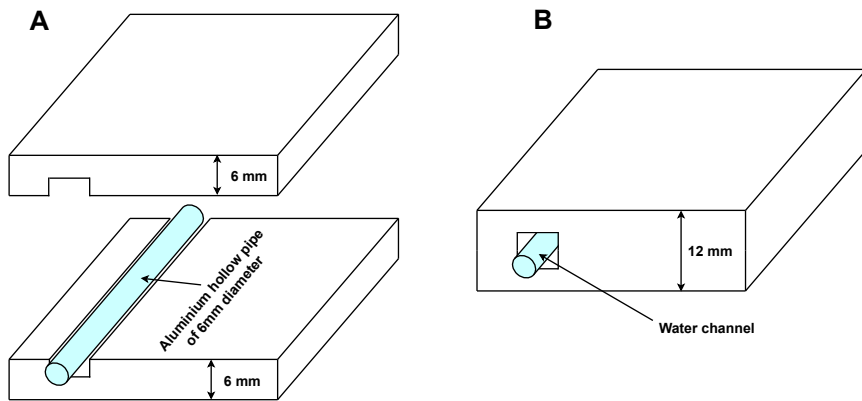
Building of water channels of diameter 6 mm inside 12 mm thick aluminium plate. Preparation of grooves on plates in mirror image (A), welding two plates together such that they house water pipes of diameter 6 mm inside (B).
